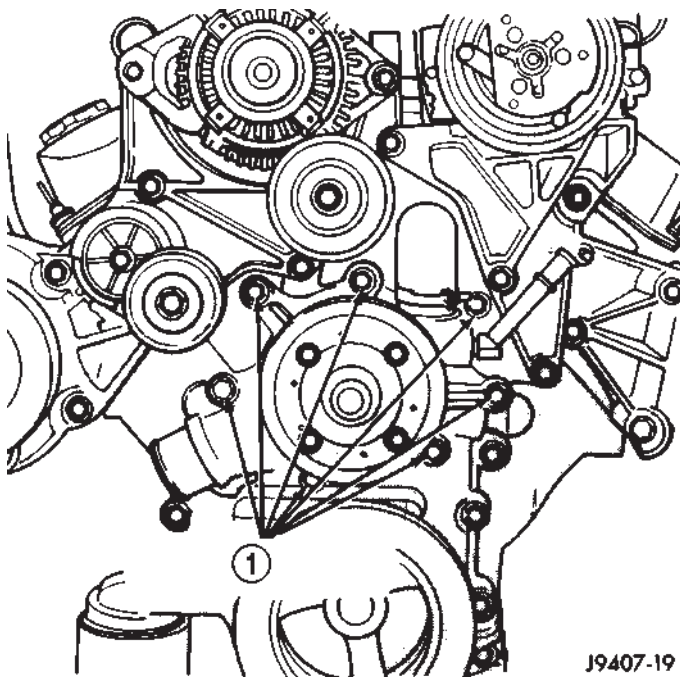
Water Pump Bolts—8.0L V-10—Typical
